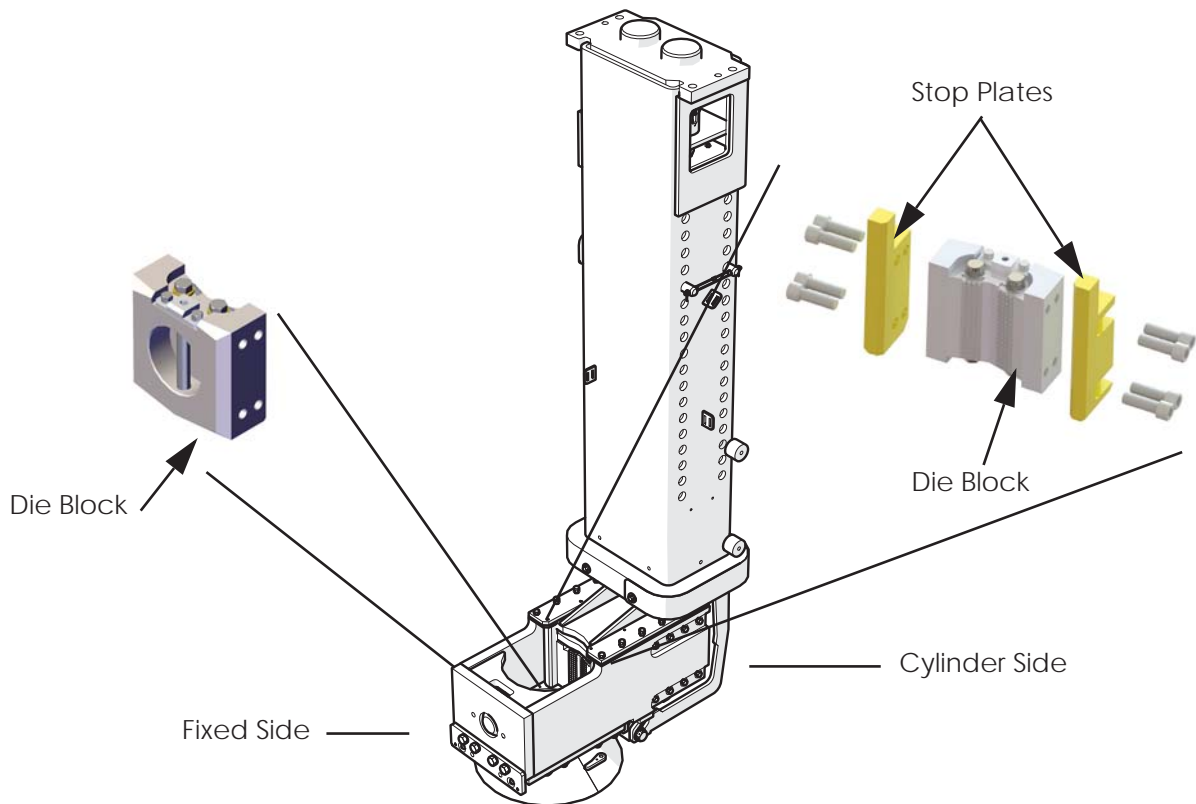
Original Die Block (Shown With Additional Stop Plates)
